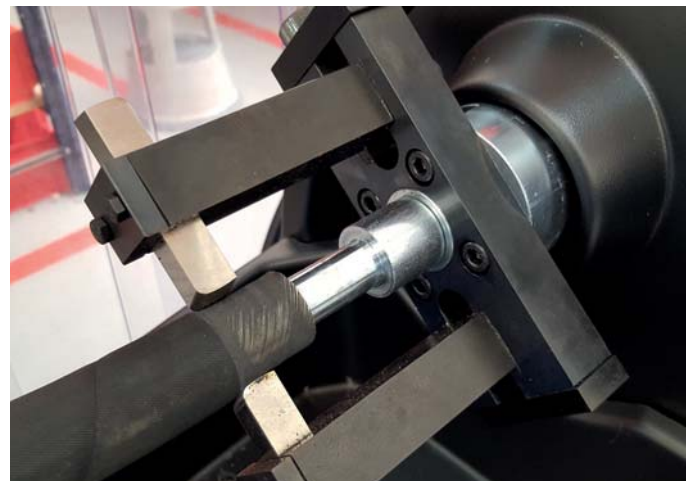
A skiving machine removing the outside cover of a 4SH hydraulic hose.
